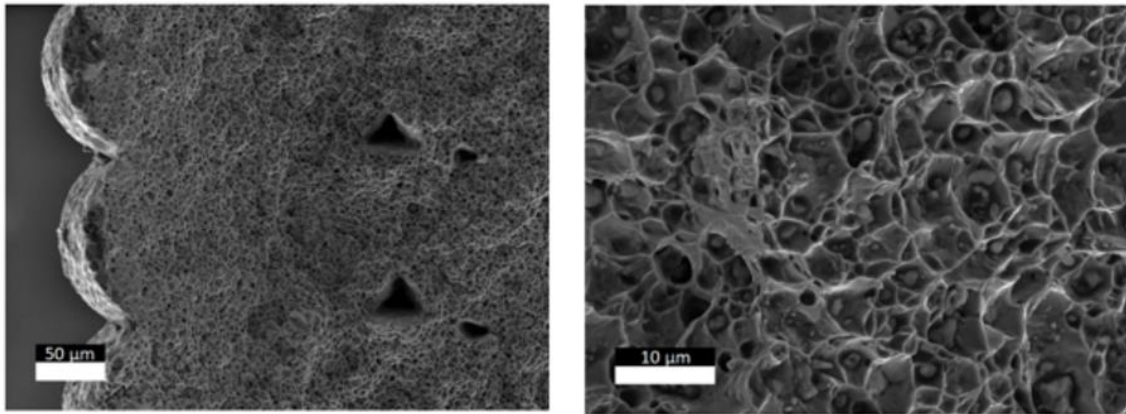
Cross section through the upper layer of the 3D-printed and sintered part of 316L [5].
